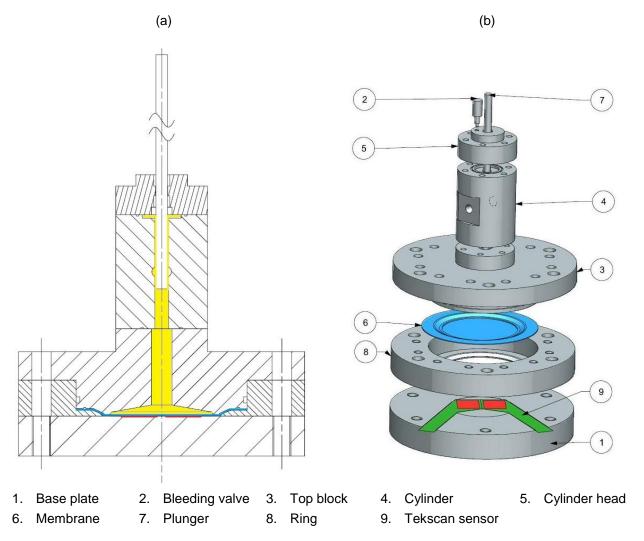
Cross sectional view of pressure cell (a) and Exploded view of pressure cell (b)
